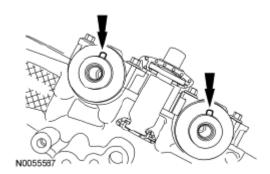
Identifying Camshaft Holding Tool Courtesy of FORD MOTOR CO.
